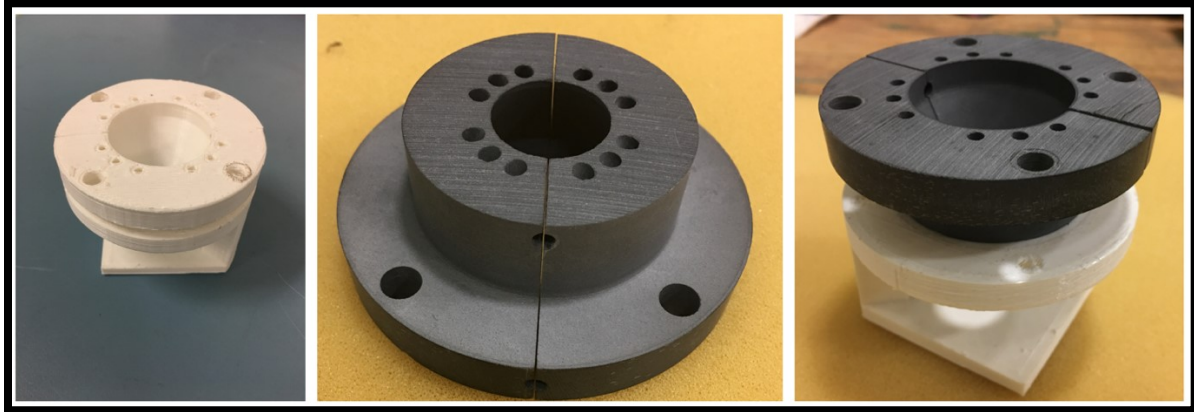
Coil B external tester fabricated through FDM on the left. Ceramic coil nozzle at the centre and nozzle and external coil tester and nozzle assembly at the right
